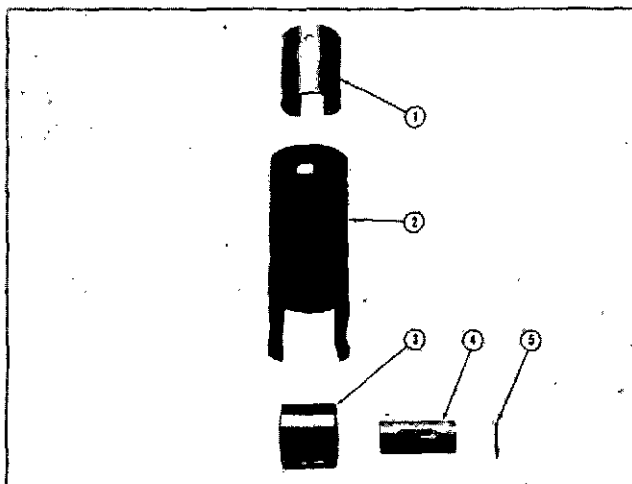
, N20404. Tappet assembly—exploded view
